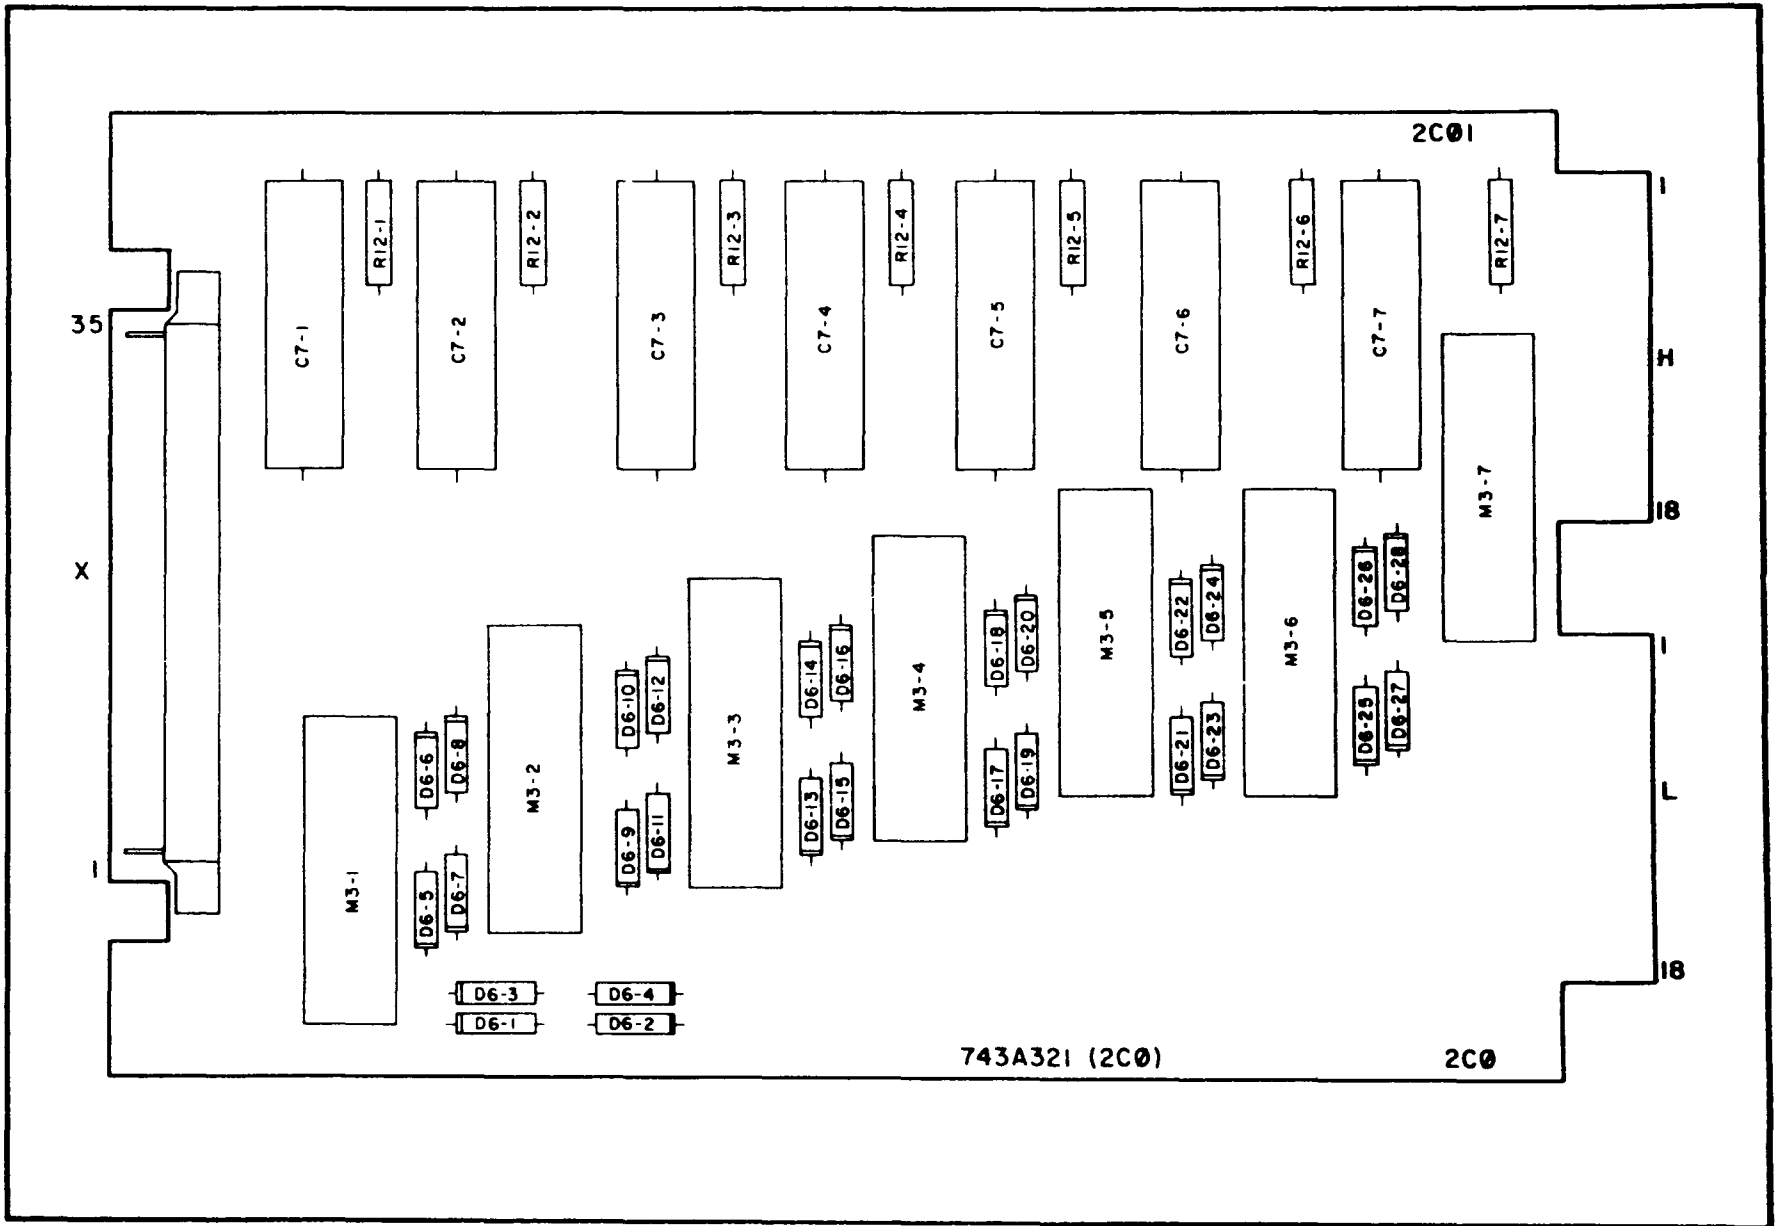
2C01 ASSEMBLY (REF. DWG. 743A321, SUB 9)
